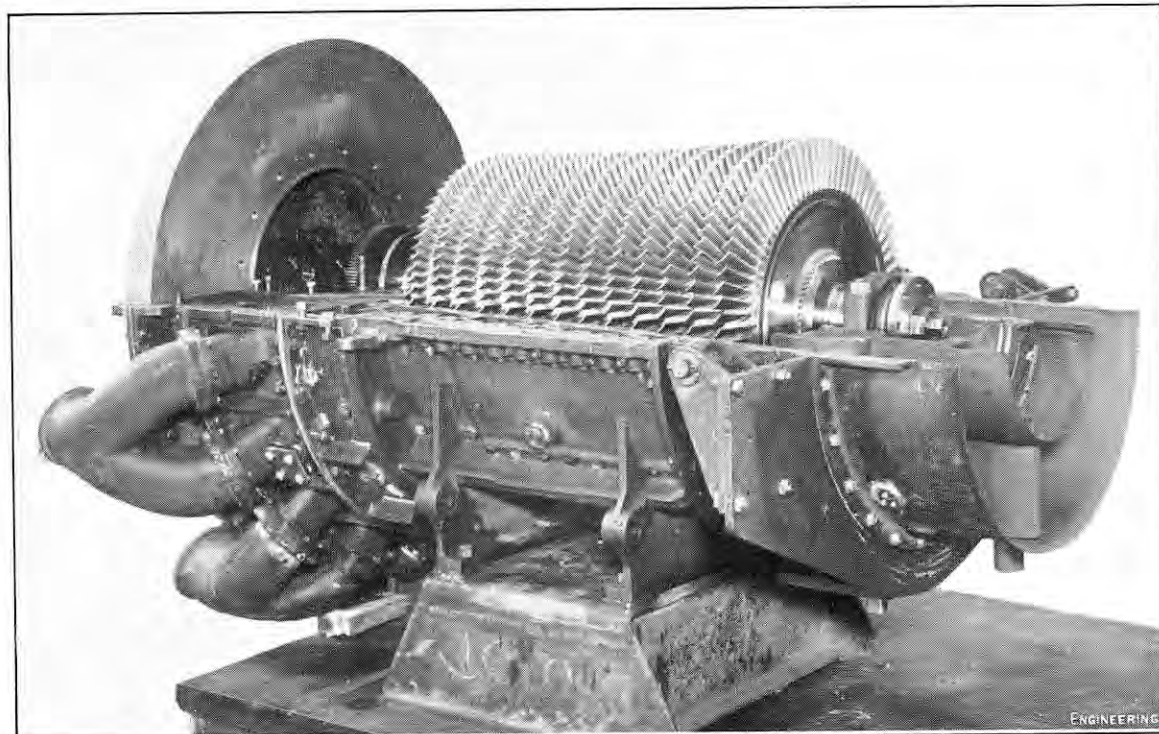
BOTTOM HALF OF COMPRESSOR CASING, ROTOR IN POSITION.
